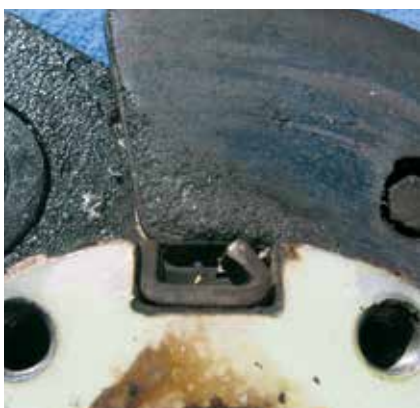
Photo D: A close-up of a damaged lug receptacle due to the extreme heat, which dislodged the steel lugs.
